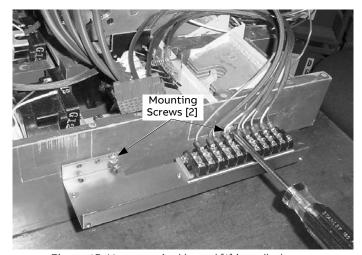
New terminal board [1] installed on an 800–2000 A stationary breaker.
